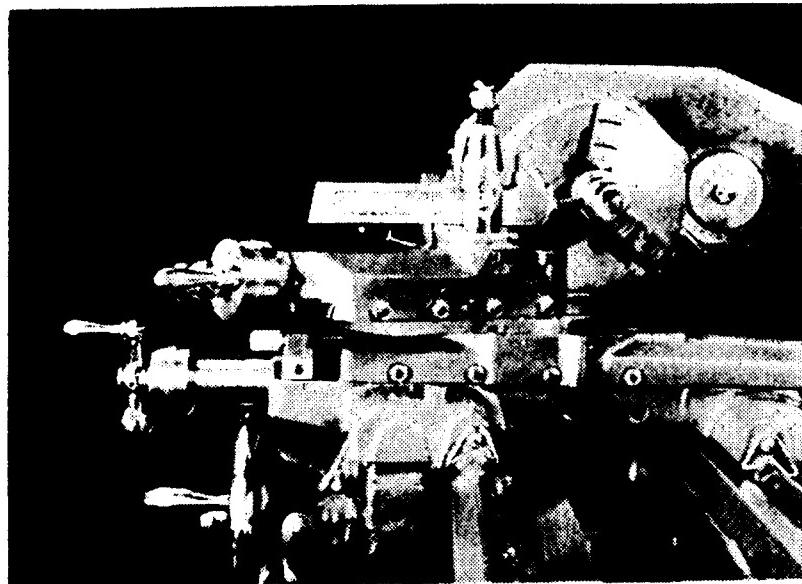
A. Thread Cutting Stop attached to Saddle Dovetail
